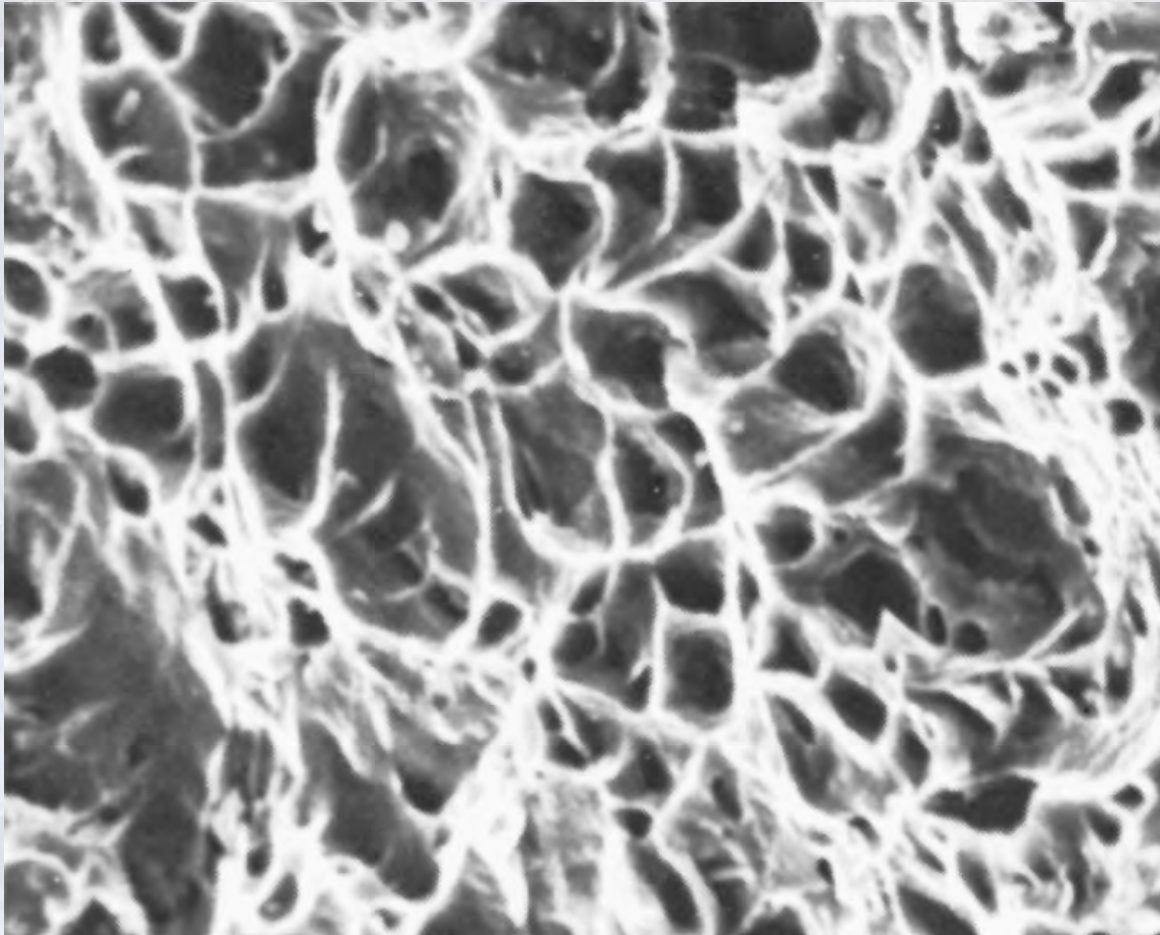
Surface of ductile fracture in low-carbon steel, showing dimples. Fracture usually is initiated at impurities, inclusions, or preexisting voids (microporosity) in the metal. *Source:* Courtesy of K. H. Habig and D. Klaffke
